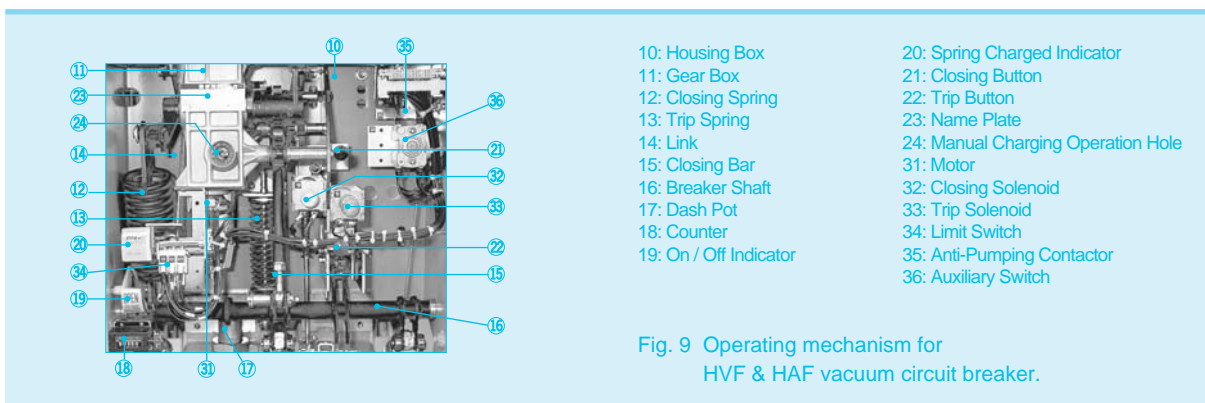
Operating mechanism for HVF & HAF vacuum circuit breaker.
